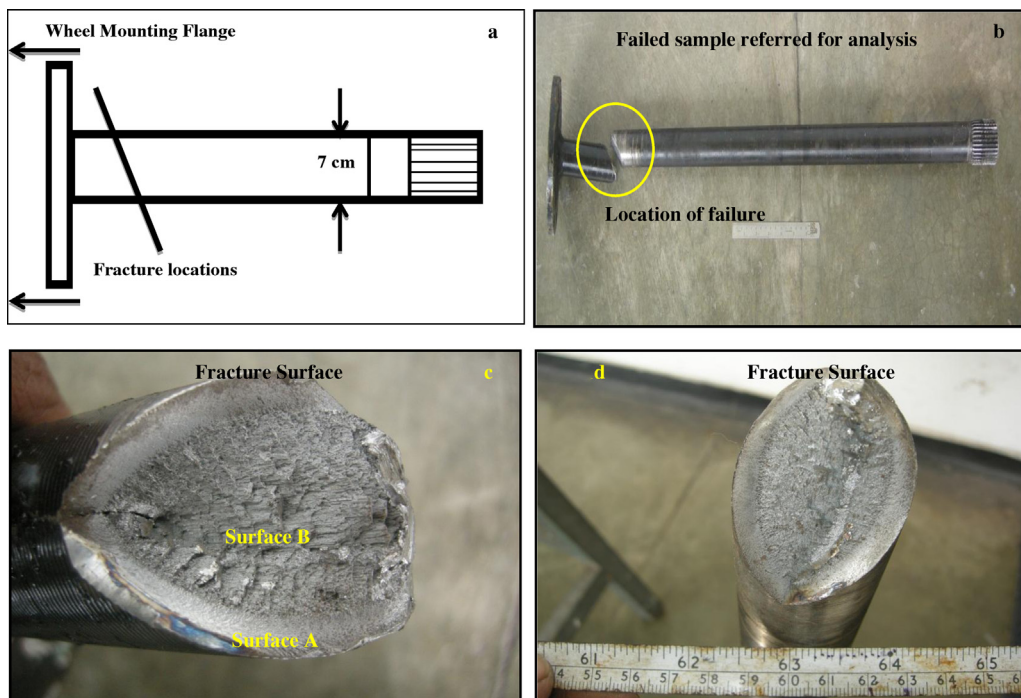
(a) Schematic illustration of the rear axle shaft showing the approximate location of the fracture near the wheel mounting flange; (b) general view of the failed axle shaft referred for analysis; (c) closer view of the fracture surface of the failed component.
